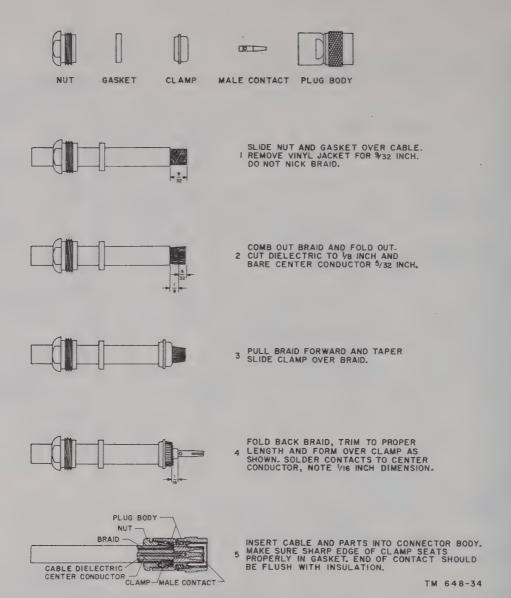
Assembly of Pluy Connector UG-573/U to a coaxial cable.
